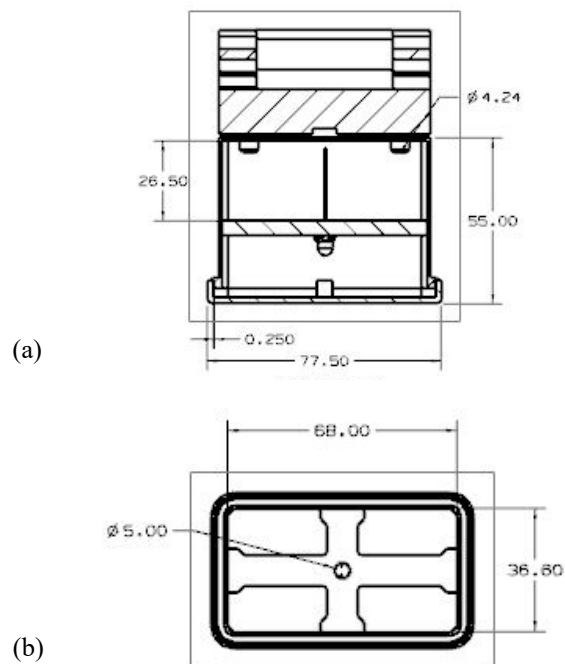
(a) Right side view of LED box, (b) top view of support structure. Dimensions are in mm.
